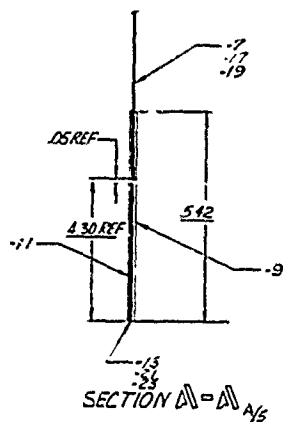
SHEAR TEST PANEL - Engineering Drawing 29-01010
